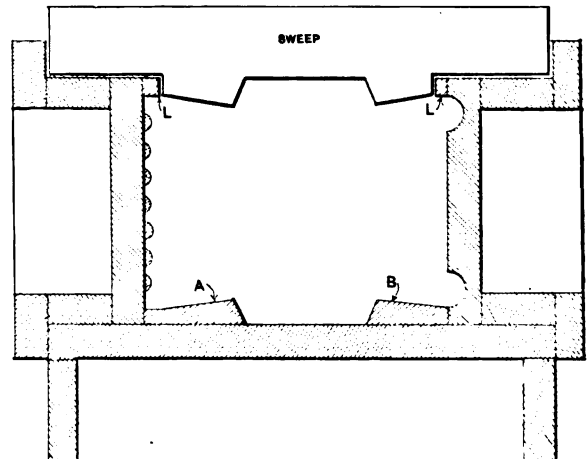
Section of Mold for 6 x 8 1/2 In. Inside Column.
